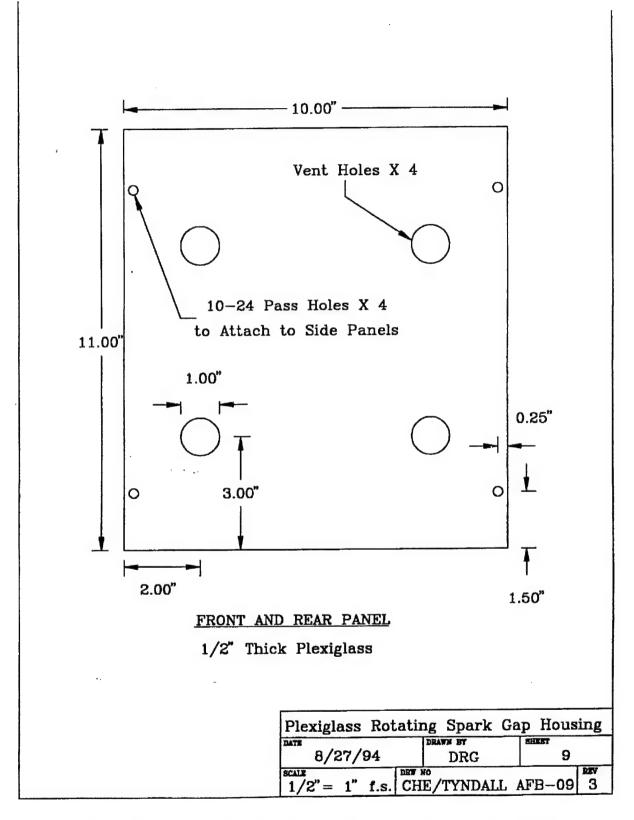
Plexiglas Rotating Spark Gap Housing - Front and Rear Panel
